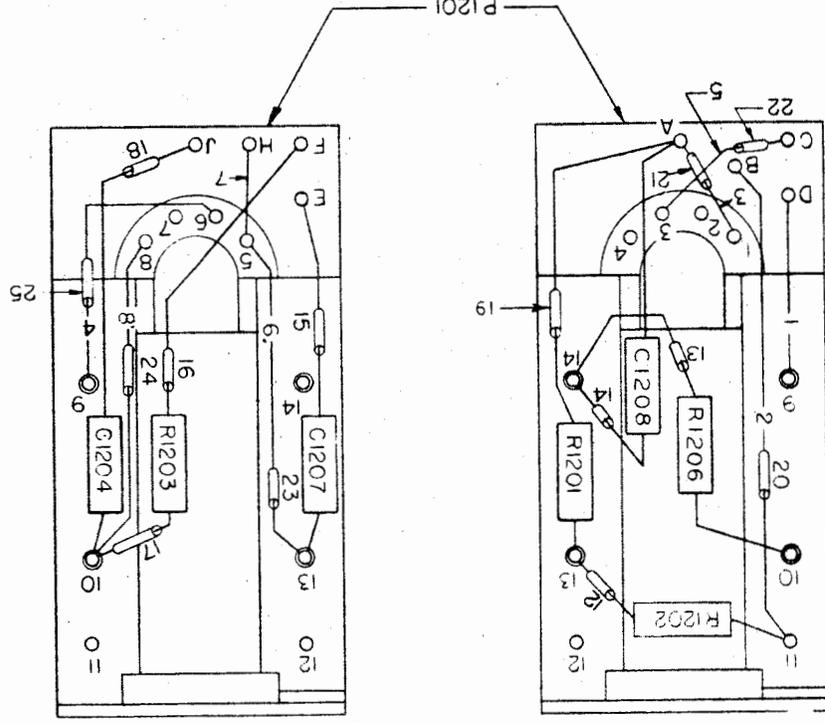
Crystal Calibrator Plug-in Unit, Z1201
